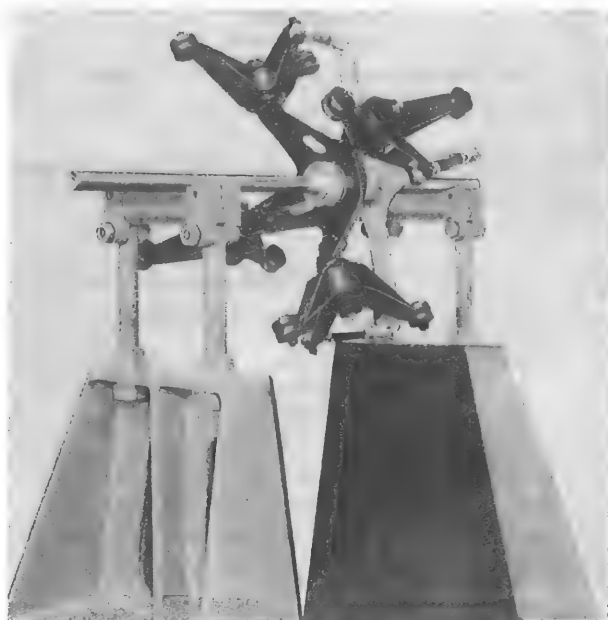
Balancing Counterweight Assembly with Sikorsky Arbor Assembly and Kell-Strom Balancing Stand And Cylindrical Balancing Ways
